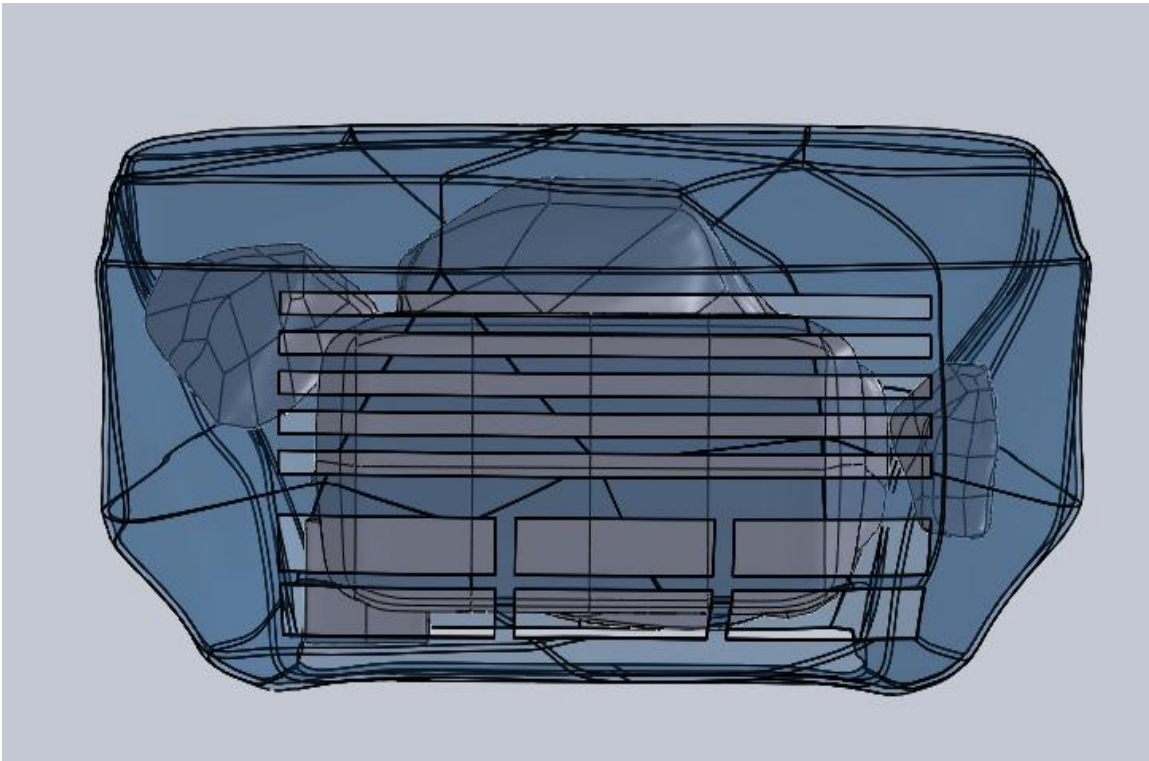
Front view of a 3-Dimensional CAD model of the car under hood, used for CFD simulations.
